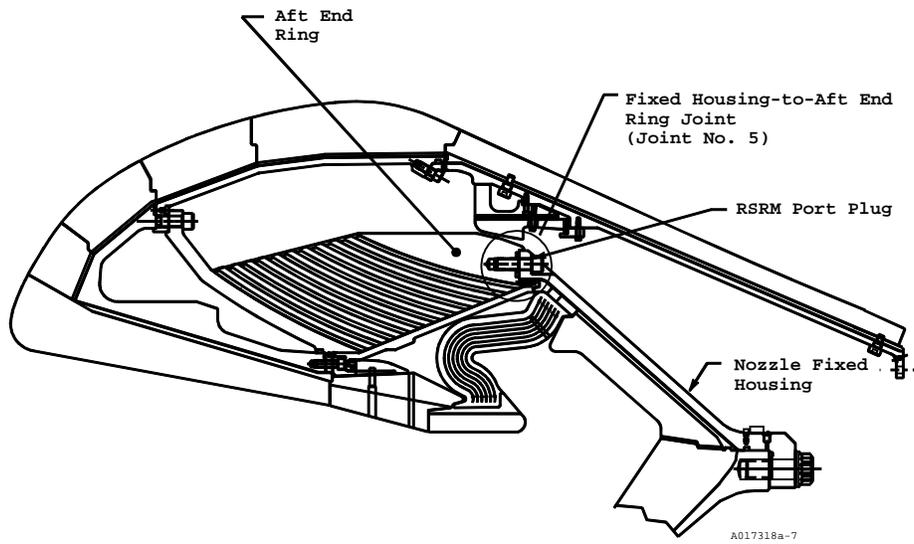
Fixed Housing-to-Aft End Ring Joint, Metal Components Locations
